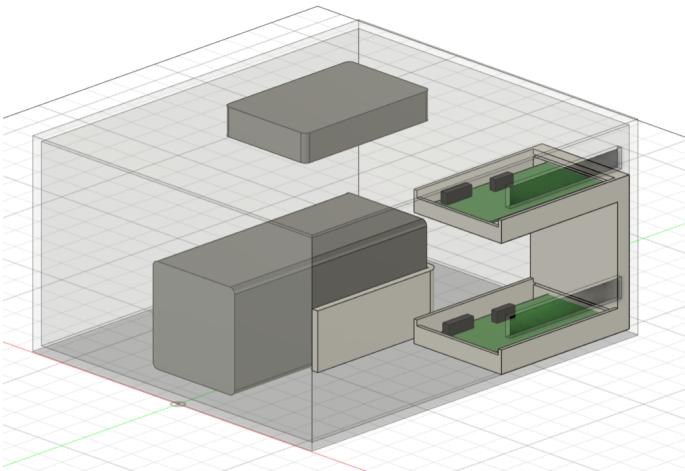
CAD Design of Water-proof Mounting Enclosure
